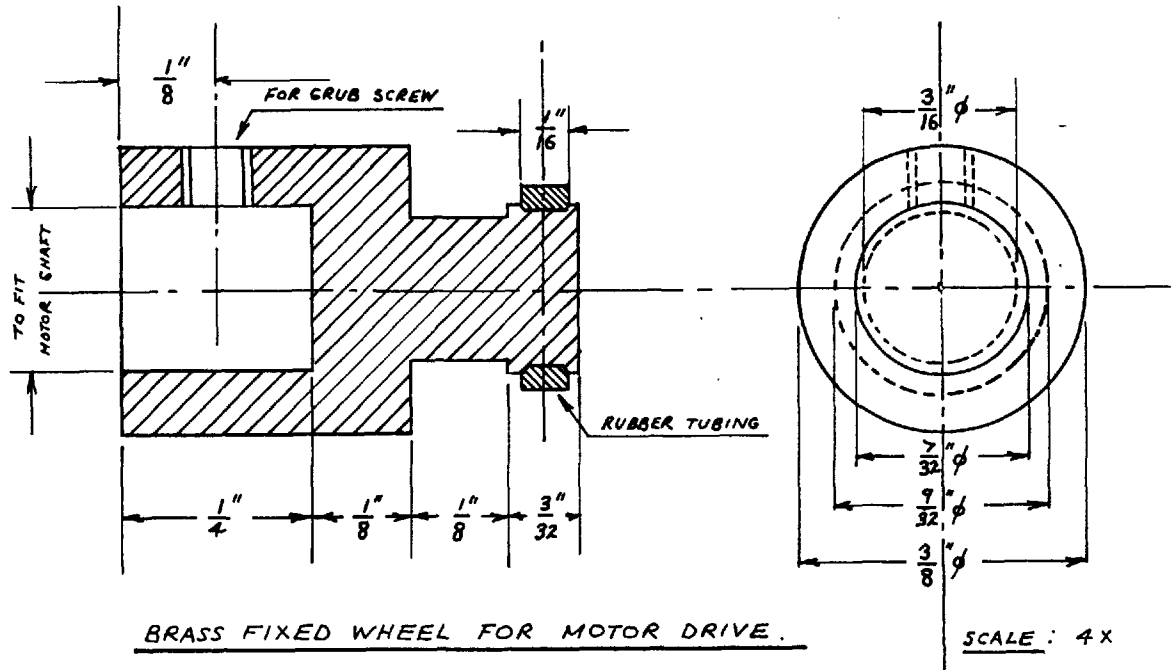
MOTOR DRIVE COMPONENTS FOR PICTURE TRANSFORMER
